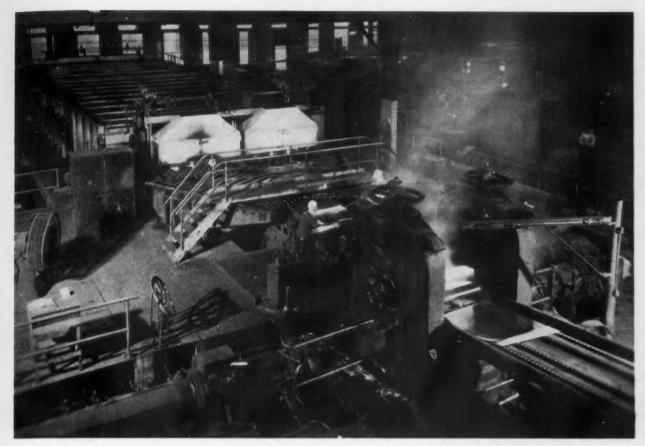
View in combination method sheet steel mill showing equipment taking sheets from furnace through the rolls.
